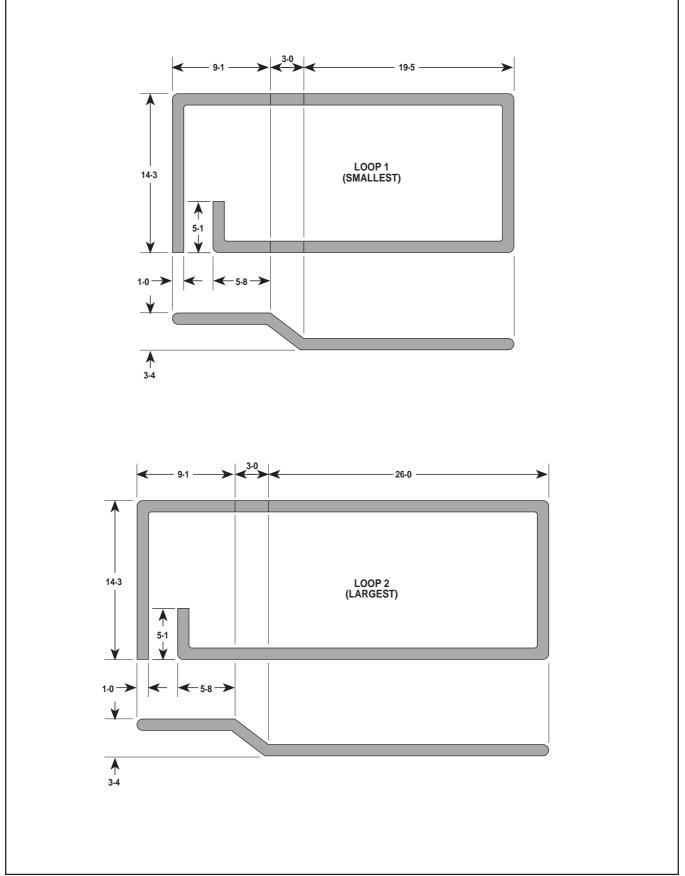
Double wire loop antenna. Dimensions: mm, material: gold plated hard drawn copper.
